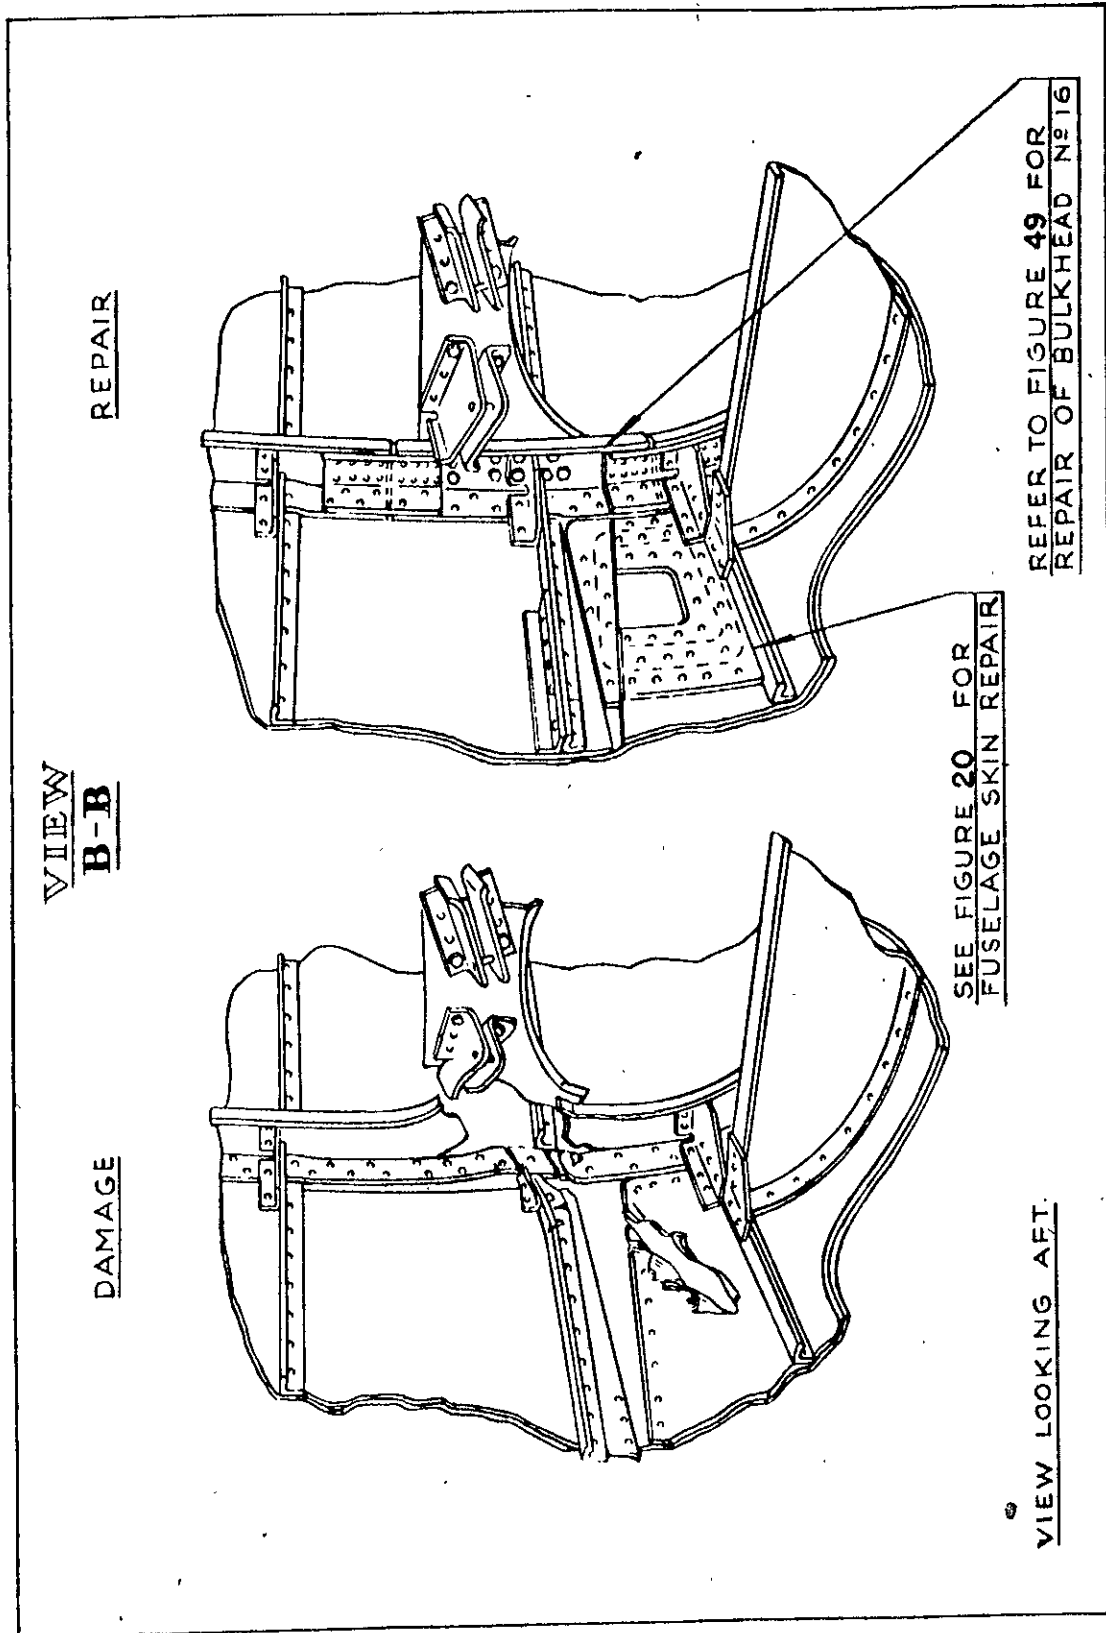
Fuselage - Skin and Bulkhead Repair Sta. No. 16
